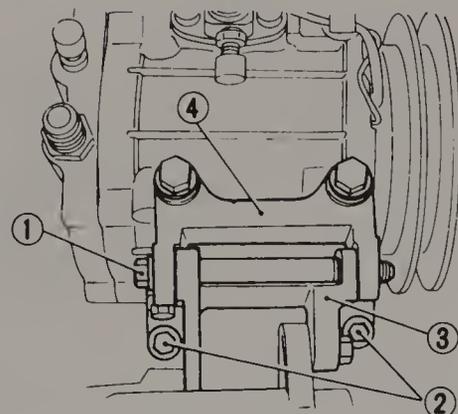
Compressor mounts and hardware (Sec 11)
